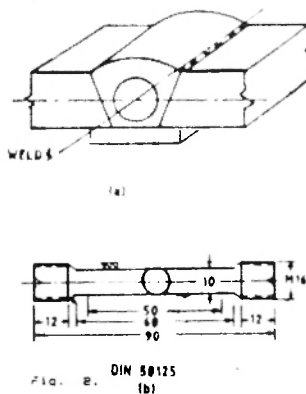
Location (1) and dimensions (b) of all weld metal tensile specimen
